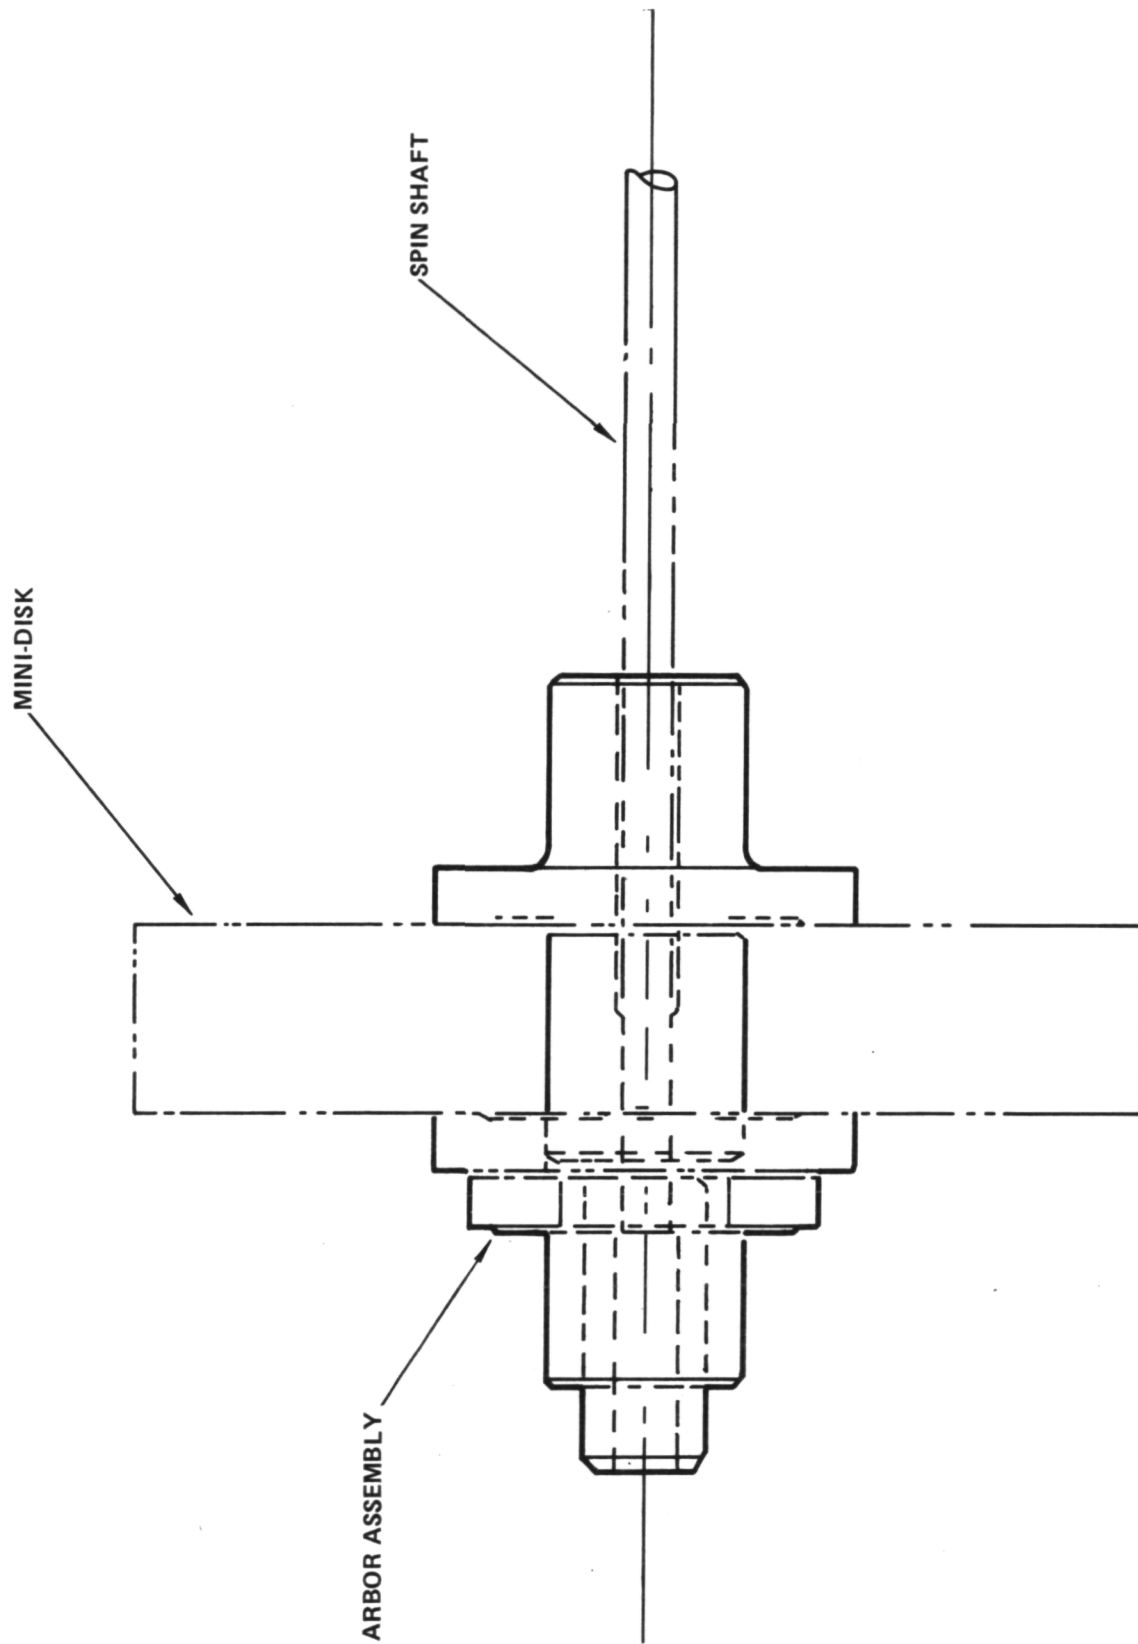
Schematic Drawing of Disk Mounted on Spin Shaft and Arbor Assembly
